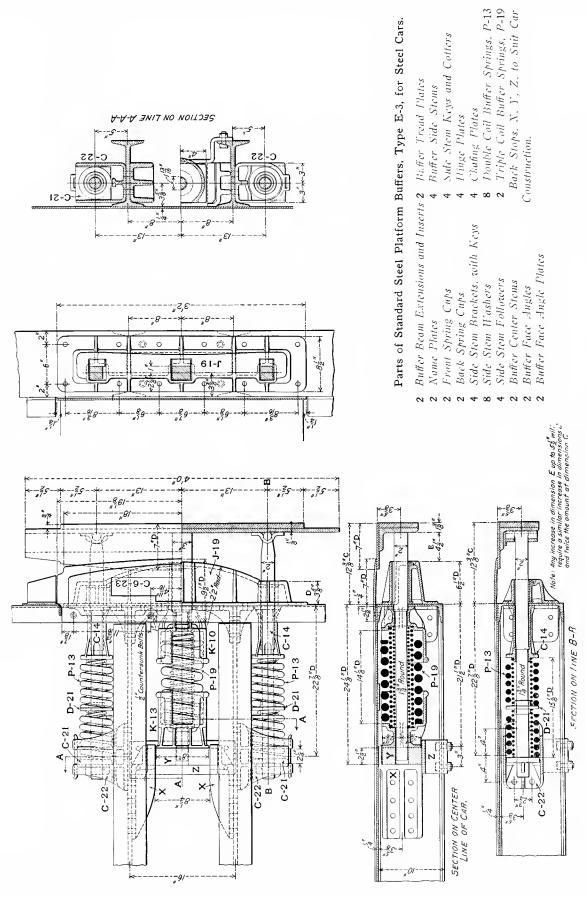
Standard Steel Platform Buffers for Steel Cars. Standard Coupler Company.
